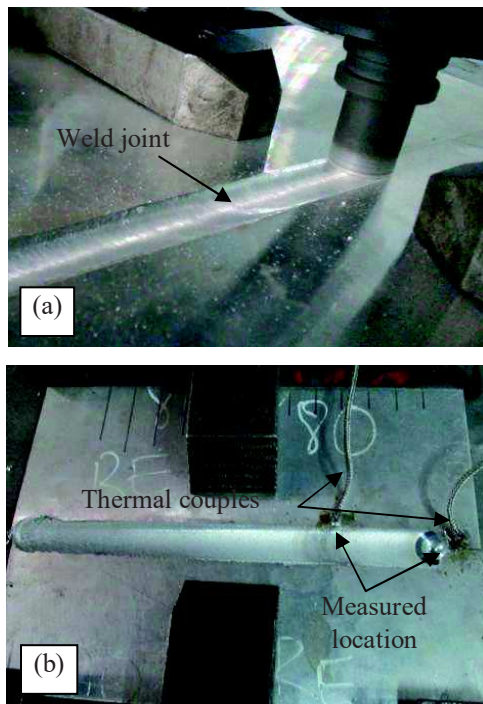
Process of welding (a) and measuring temperature (b)
